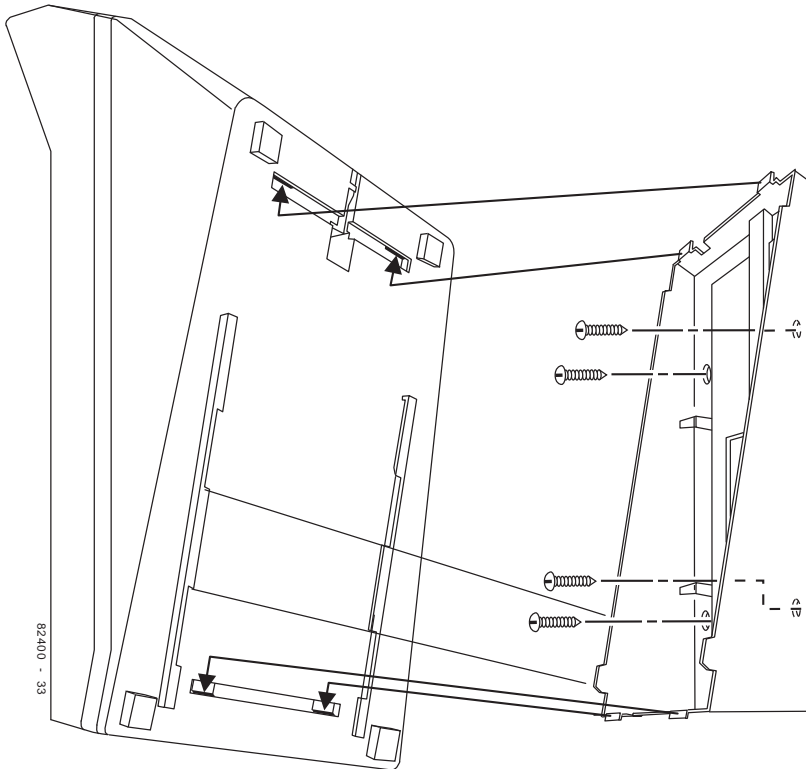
INSTALLING THE WALL MOUNT BRACKETS
